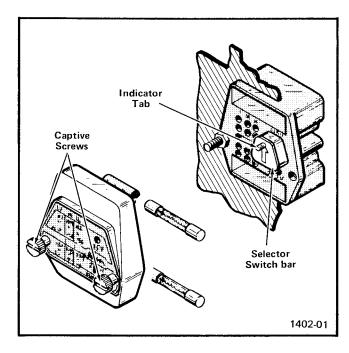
Line Selector assembly on rear panel (shown with cover and fuses removed).
